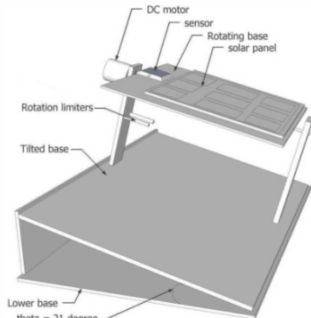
Mechanical Design of Tilted Single Axis Tracker
